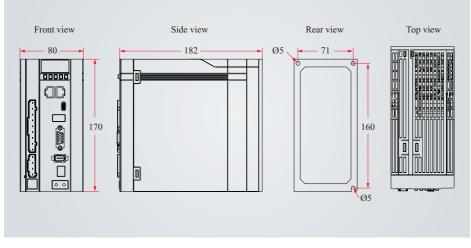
Installation dimensions for SIZE D (unit: mm)
